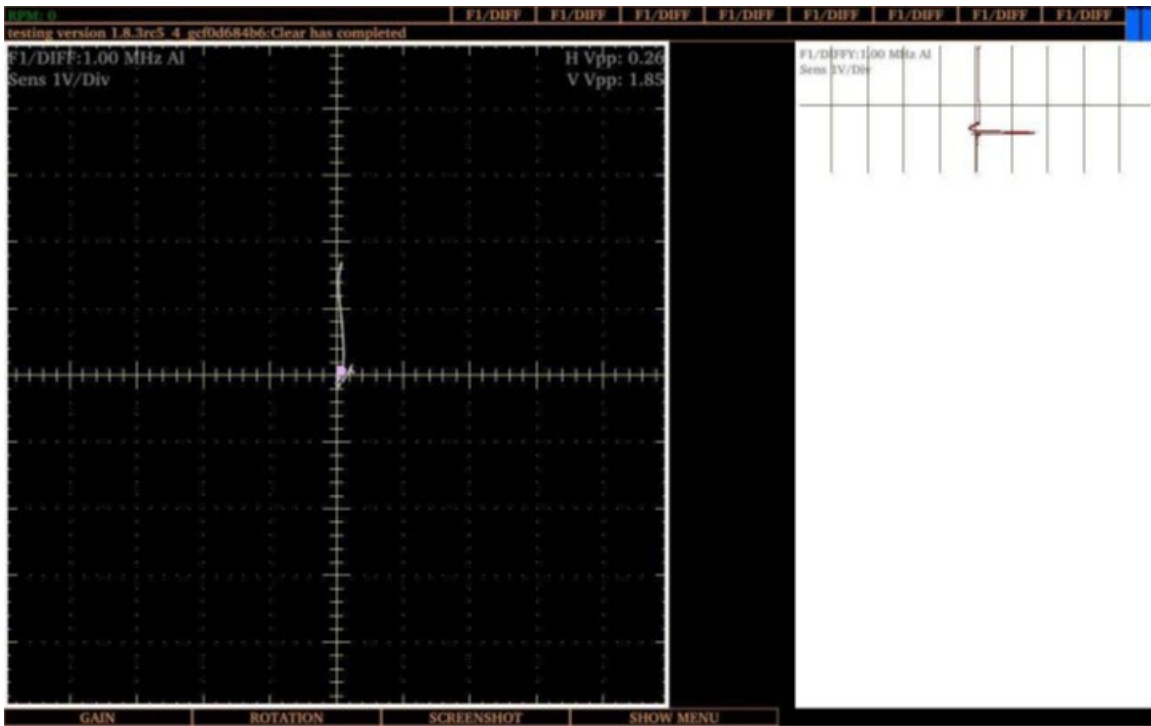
ET indication of defect at Location A in fillet weld test panel TTCI-P2
